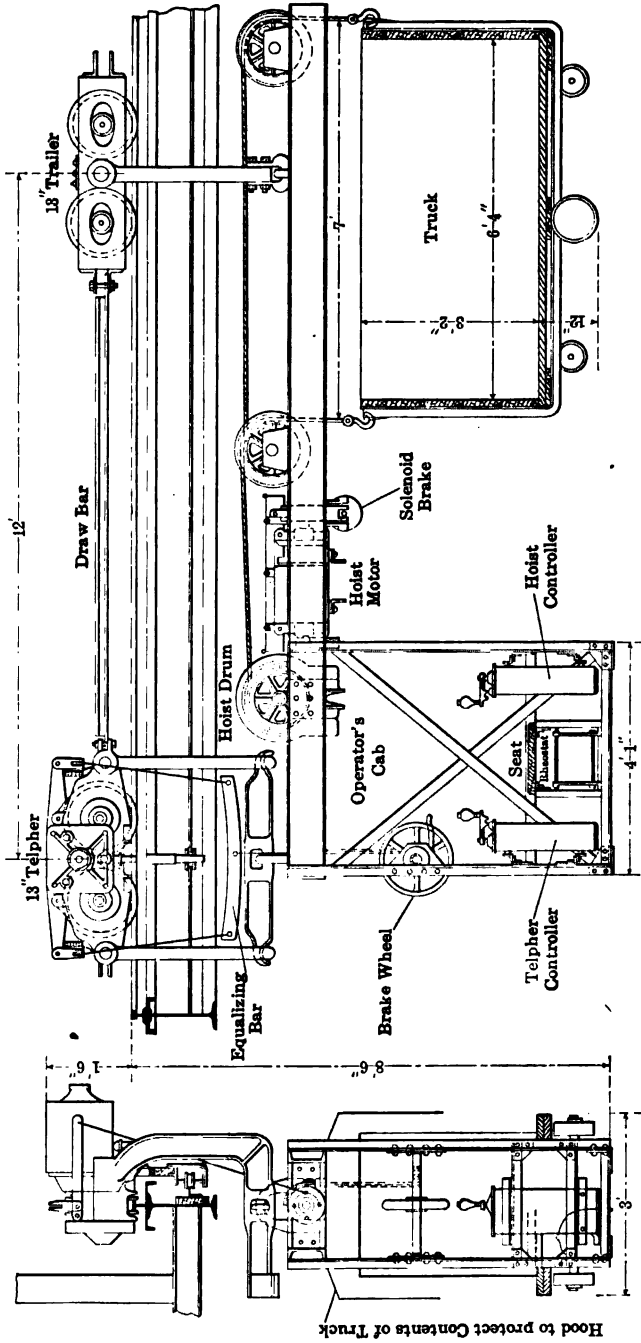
Details of carrier system at Bergen, N. J.—Erie Railroad.
